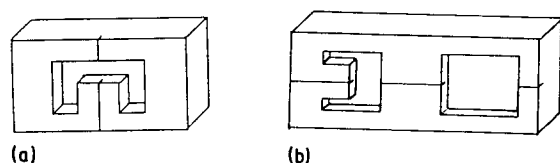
(a) Silicone rubber mould for moulding the pull-out specimens. (b) Silicone rubber mould and specimen for observation of pull-out process using optical microscopy.
